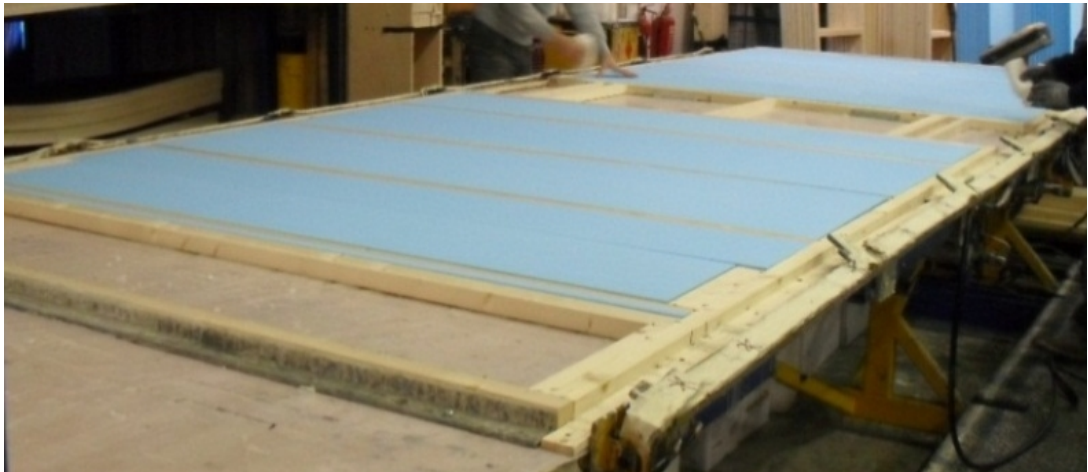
CARAVAN FLOOR CONSTRUCTION
